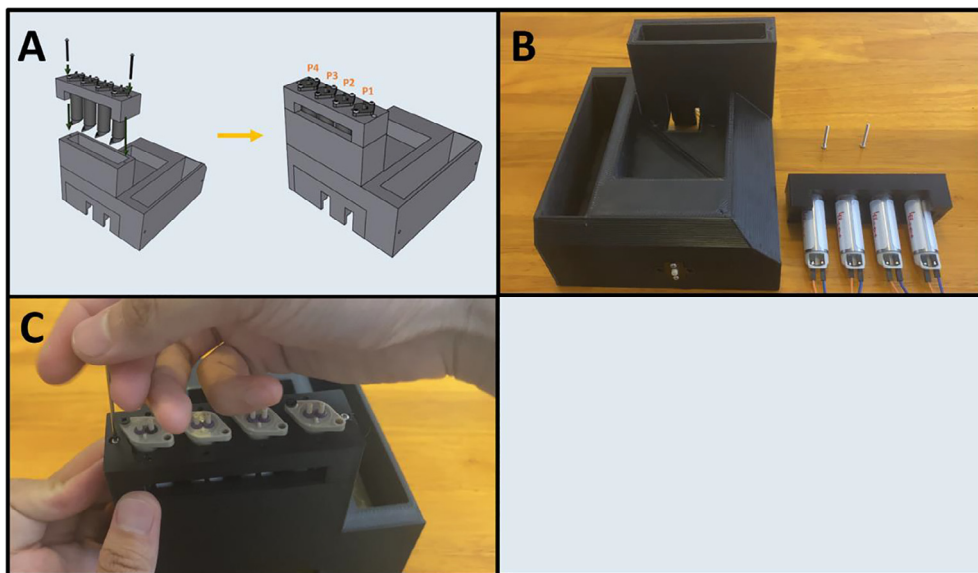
a-c: The procedure for mounting the Pump Assembly to the Base.
